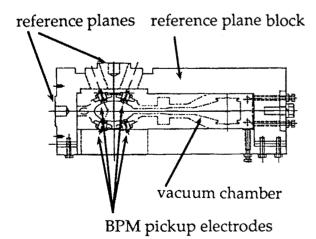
A cross sectional view of a BPM part of the vacuum chamber
